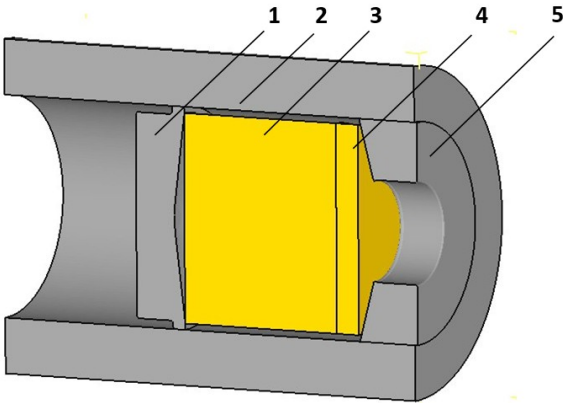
Assembly for setting the task in 3D visualization: 1 – pressing disk; 2 – container; 3 – main workpiece; 4 – additional workpiece; 5 – matrix extrusion die
